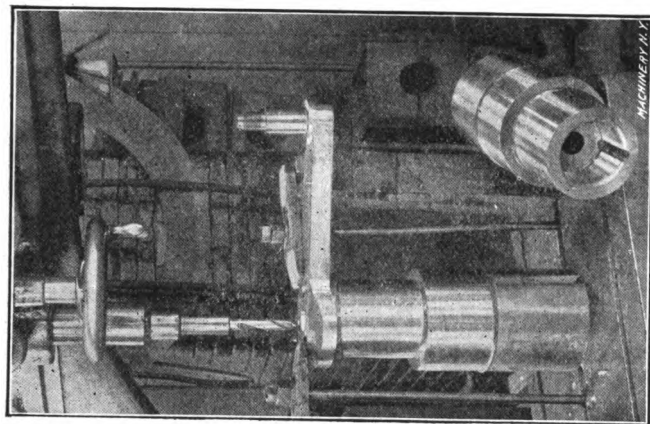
Drilling the Dowel Holes for Locating the Return Crank
